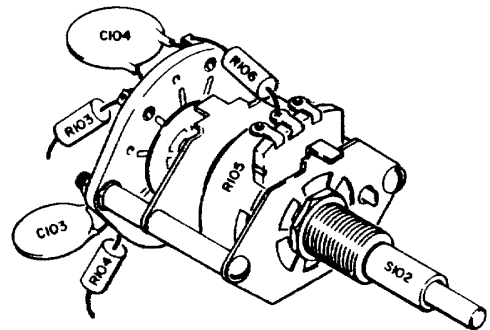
Trigger Level/Trigger Slope Switch Assembly, Location of Parts
